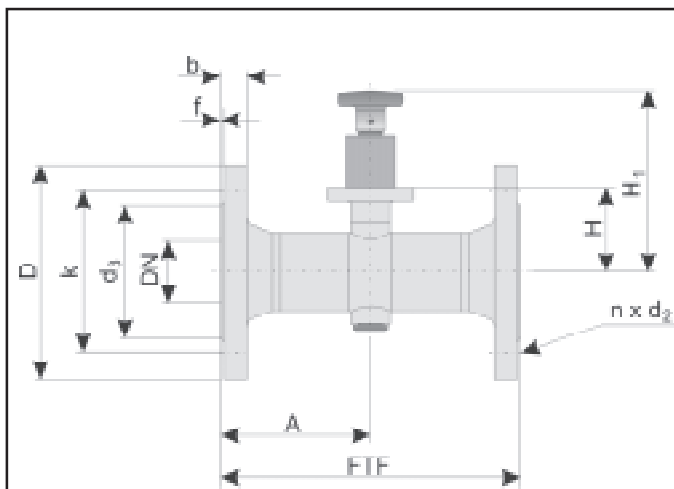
Dimensional drawing of the sampling valve (from DN 50)
